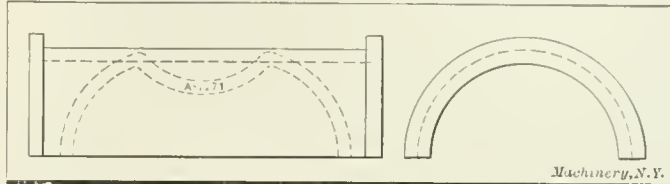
Die-cast Half-round Bearing, showing the Cast Oil Groove
